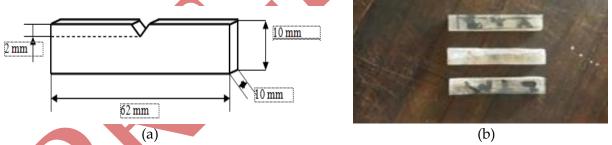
(a) Design specimen standard ASTM D265 and (b) result of specimen fabrication.
